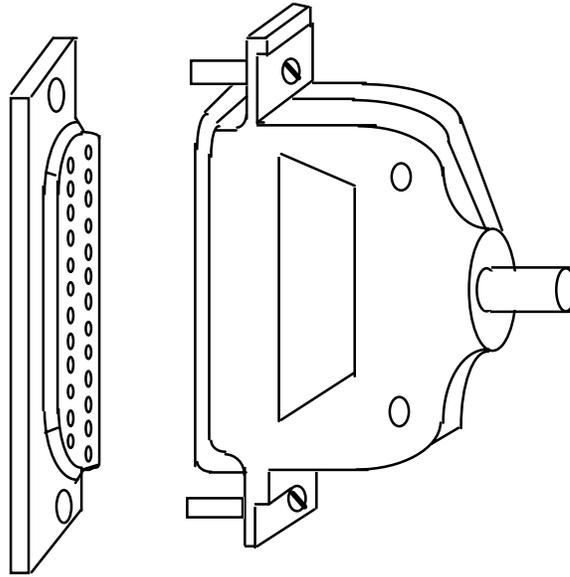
Typical Hooded Cable Grounding Arrangement
